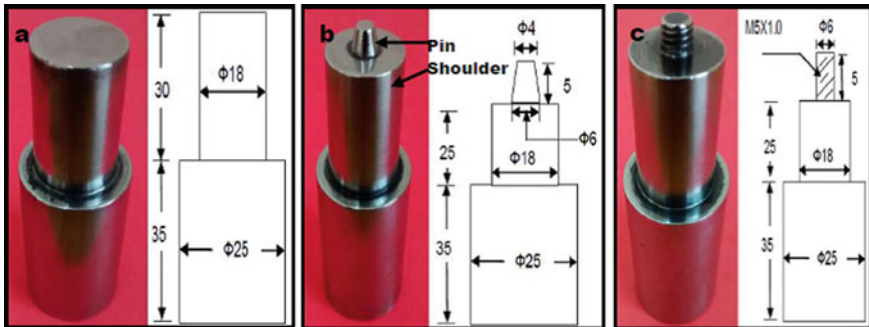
a Pinless tool, b Taper pin tool, c Threaded pin tool
